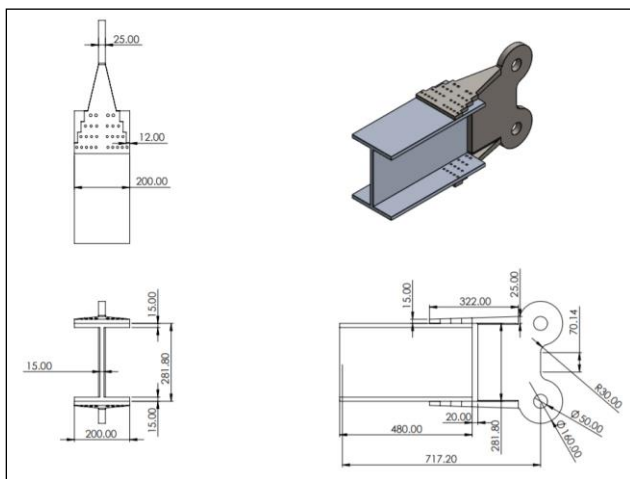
Geometric configuration of the wing fuselage lug attachment bracket
